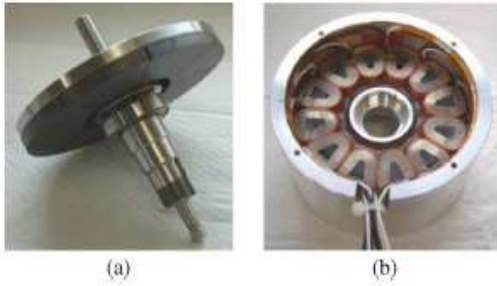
(a) Rotor of the motor, (b) Stator of the motor
